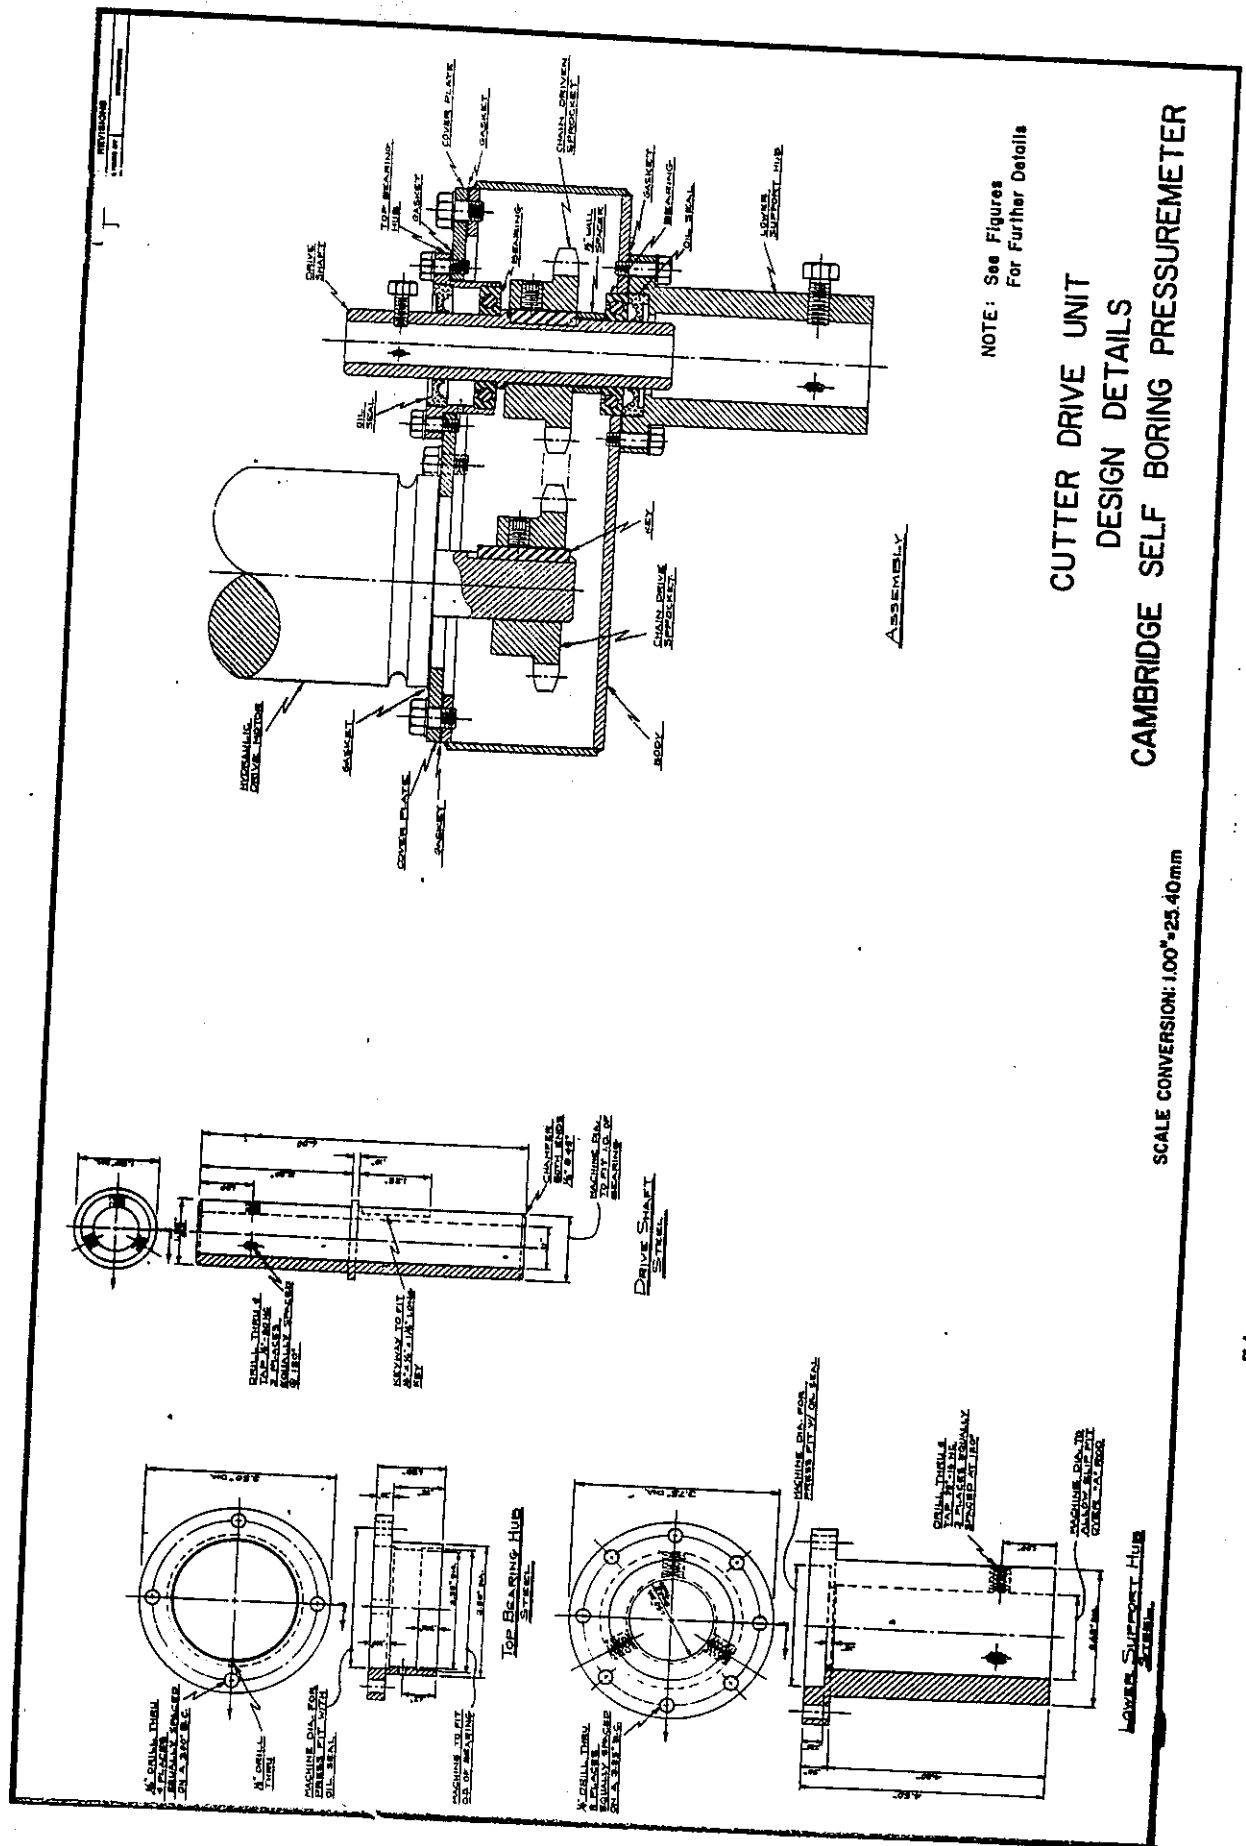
CUTTER DRIVE UNIT - DESIGN DETAILS - 1
